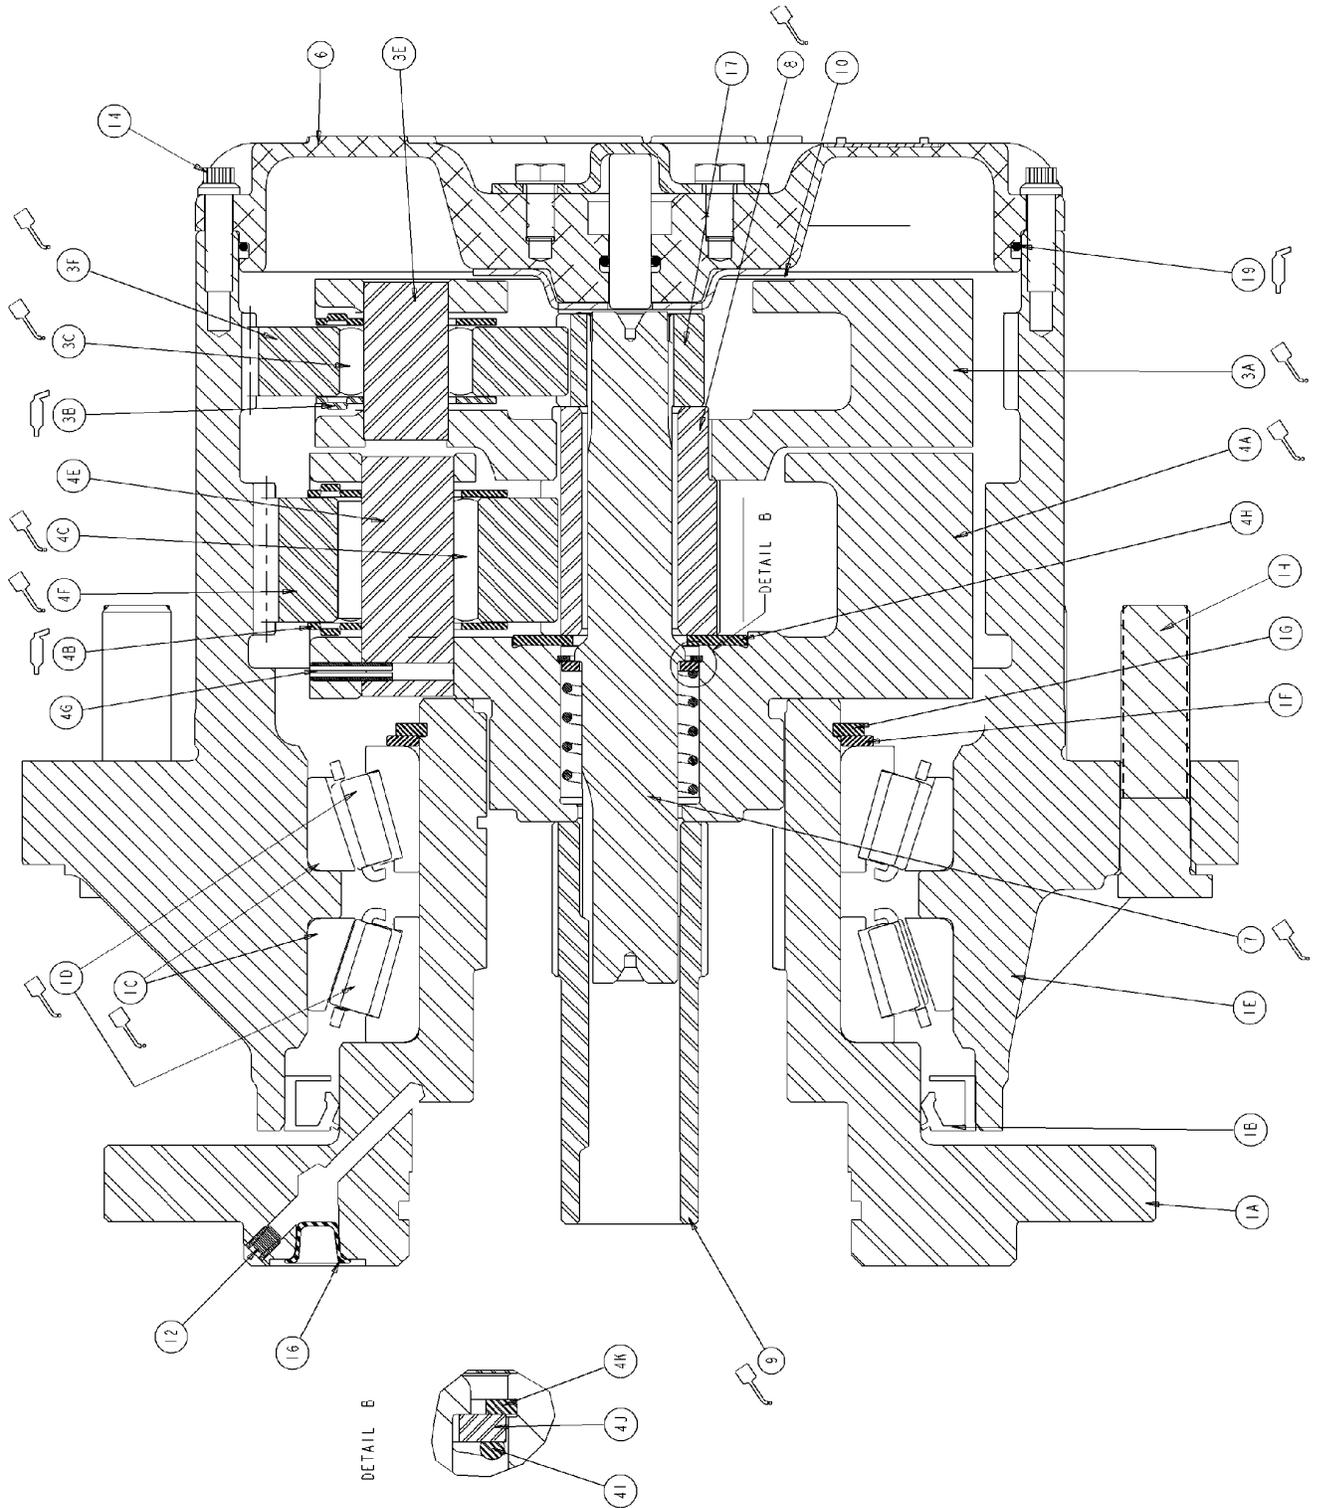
Assembly Drawing - Without Integral Input Brake - Sheet 1 of 2
